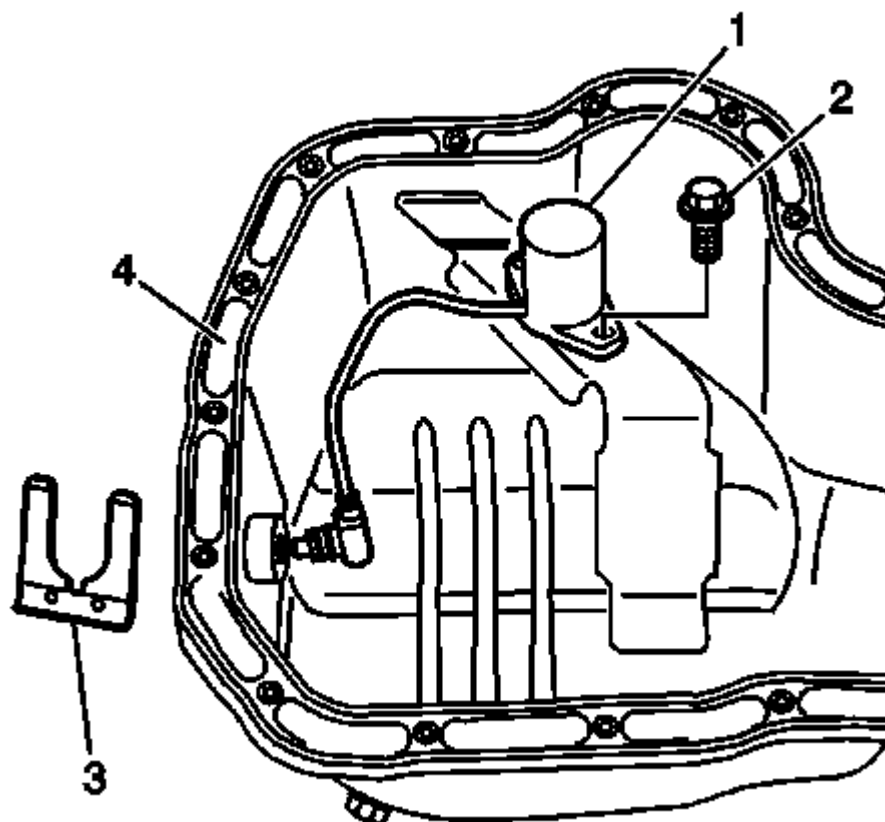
View Of Oil Level Sensor, Clip, Bolt & Oil Pan Mating Surface
